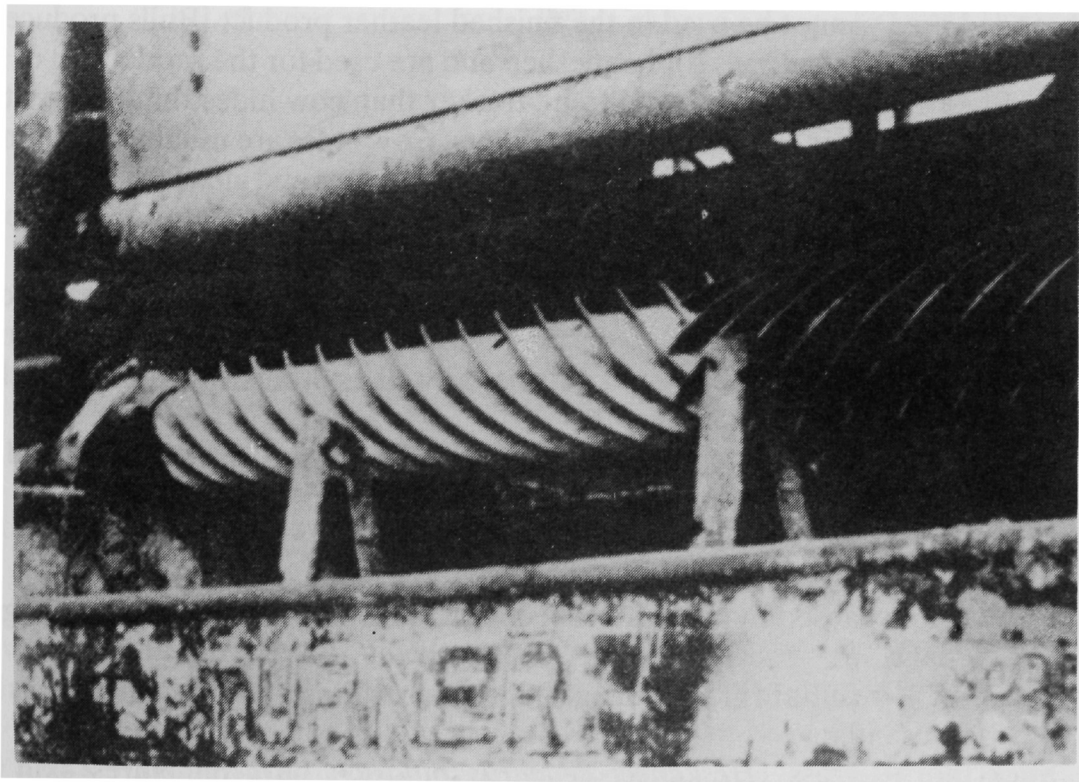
Helical blade used on fleshing machine to remove unwanted material. From New England Tanners Club (1983).
